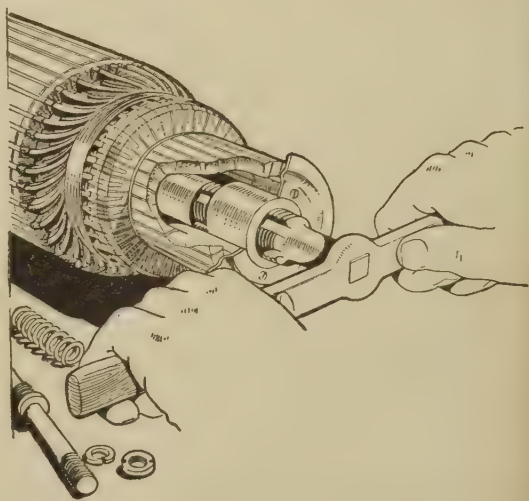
Extracting the C.A.V. Axial Starter Oil-less Bush.
